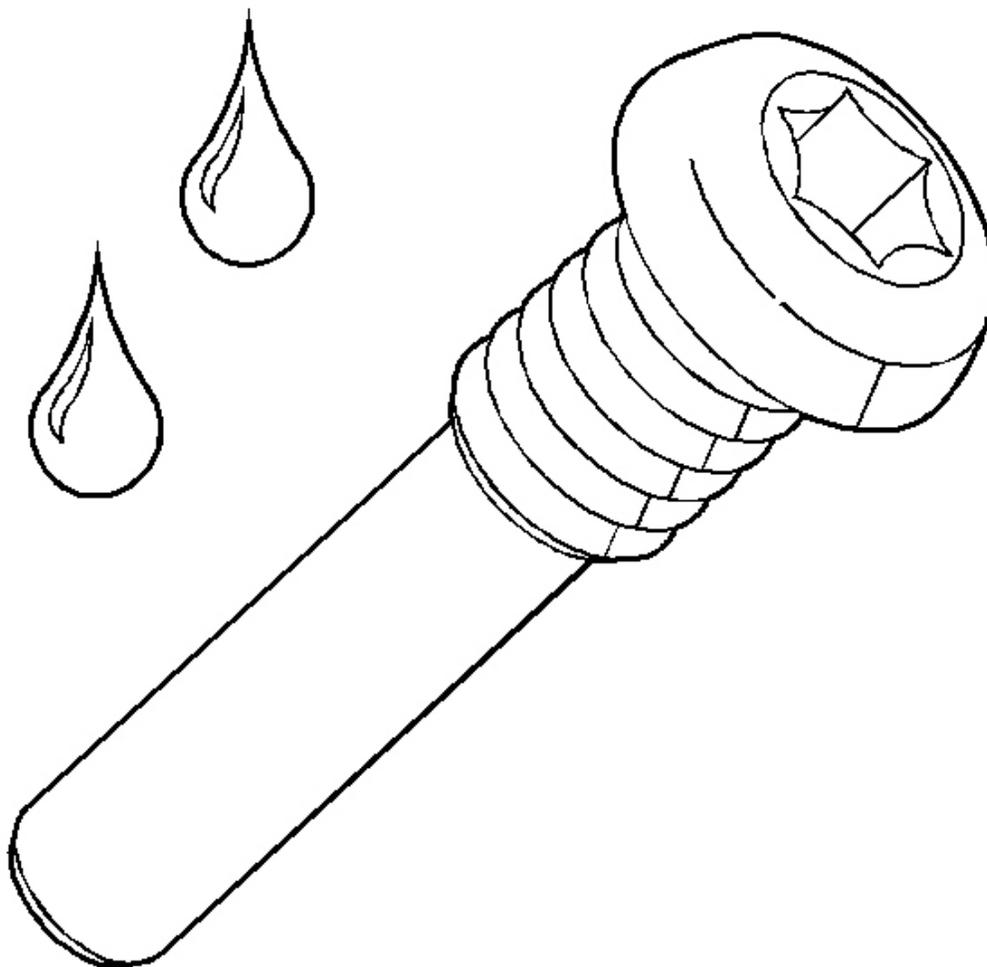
Applying Sealer To Shift Lever Guide Bolts Threads
